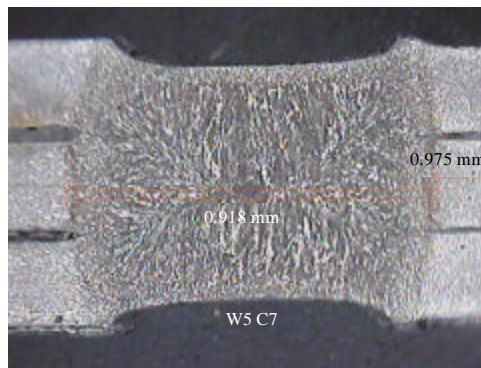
The macrograph for three sheet layers using 7.0 kA weld current (dimension measured with 5X magnification)
